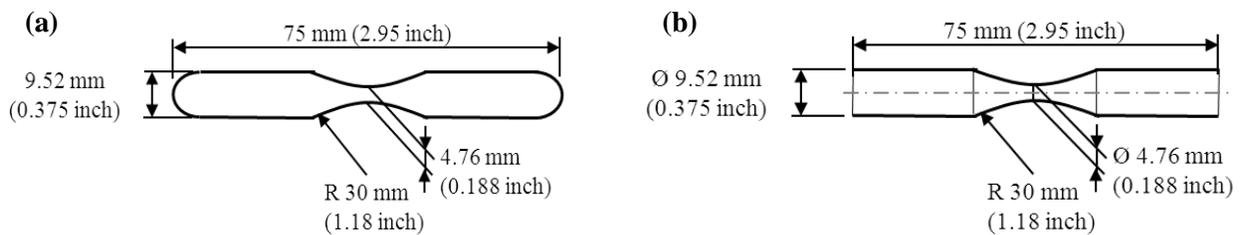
(a) Flat axial fatigue specimen design used to determine as-sintered fatigue limit, height = 5.75 mm (0.23 inch) ; (b) cylindrical axial fatigue specimen design used for heat-treated evaluation
